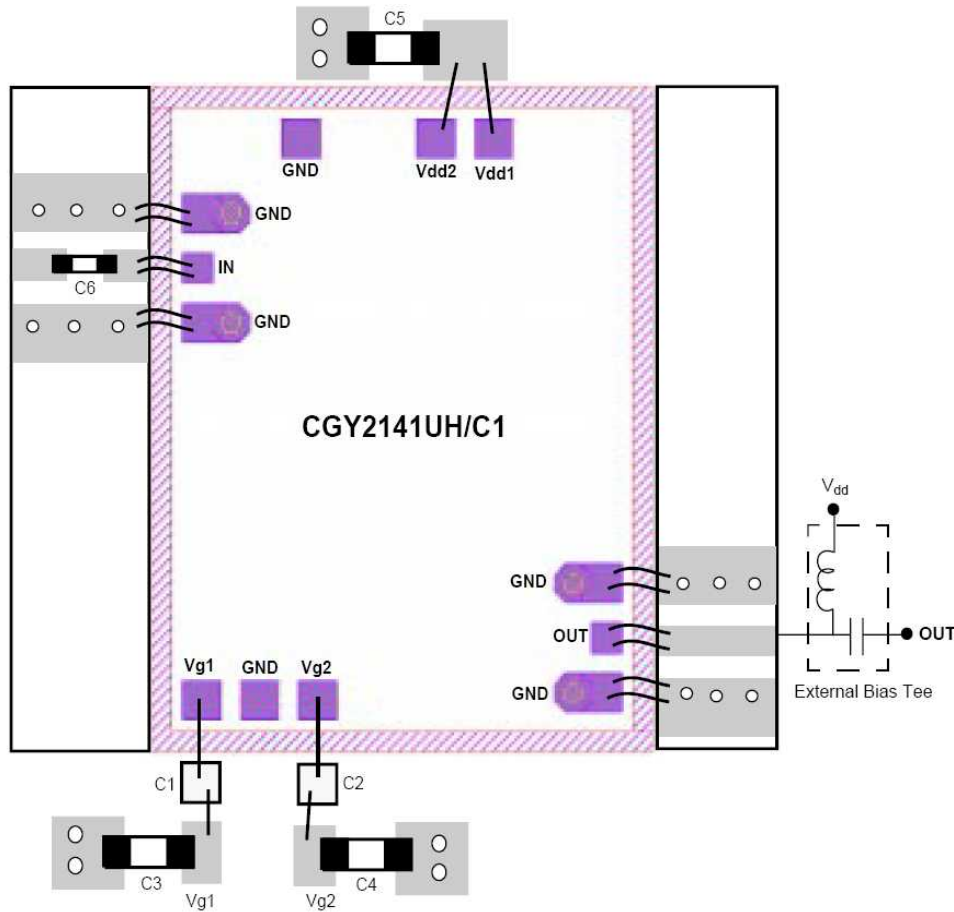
CGY2141UH/C1 module layout : coplanar assembly
